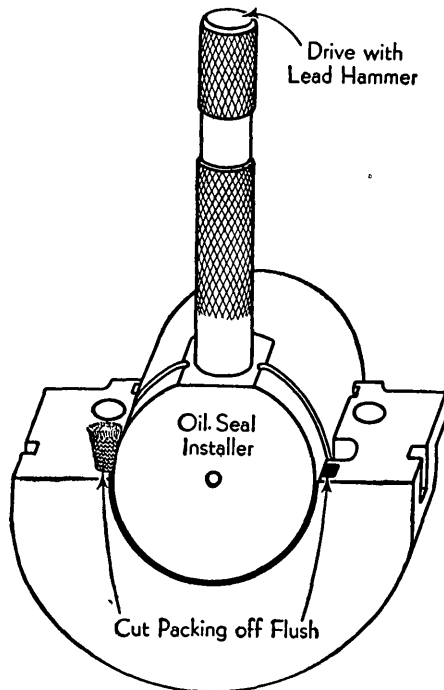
Installing rear main bearing oil seal, 1939-49 Sixes and all 1950-52
